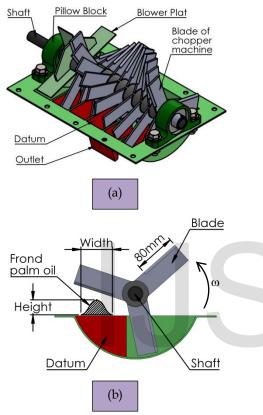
Construction of portable chopper machine (a) isometric view (b) Section front view
